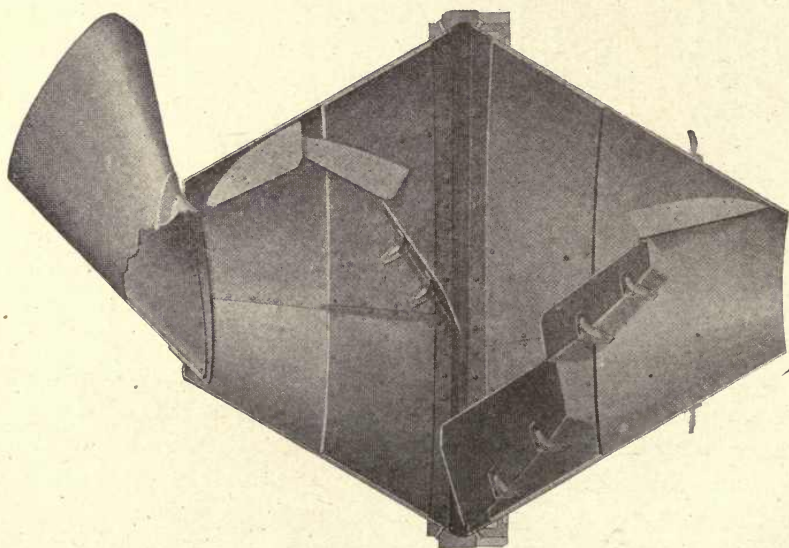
Cross Section of Drum (front half cut away), Showing Blades and Lining.
